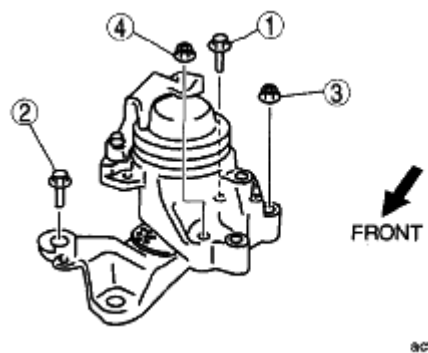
Identifying No.3 Engine Mount Stud Bolts
